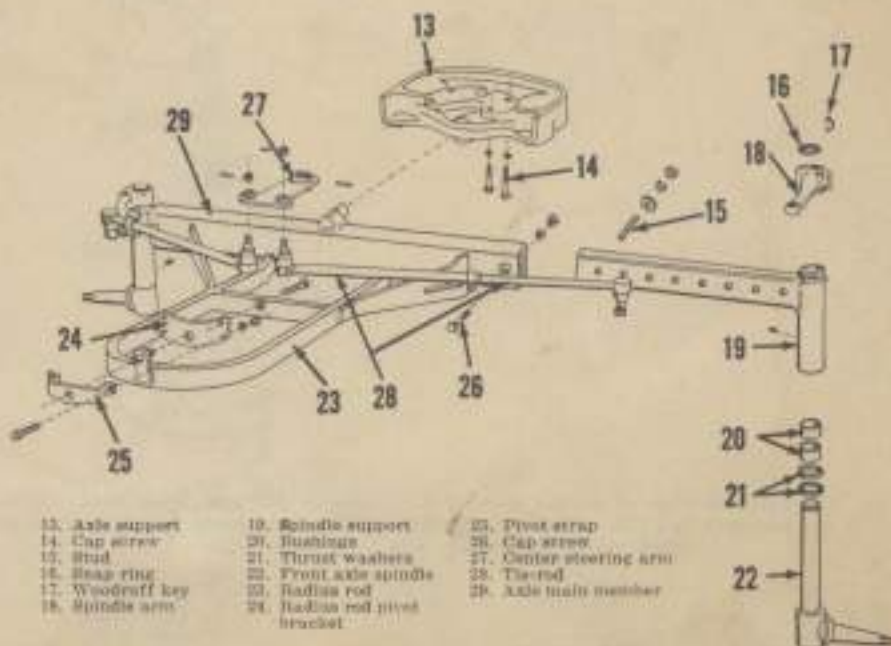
Exploded view of typical adjustable axle and associated parts. Radius rod (23) is welded to axle main member (29).
